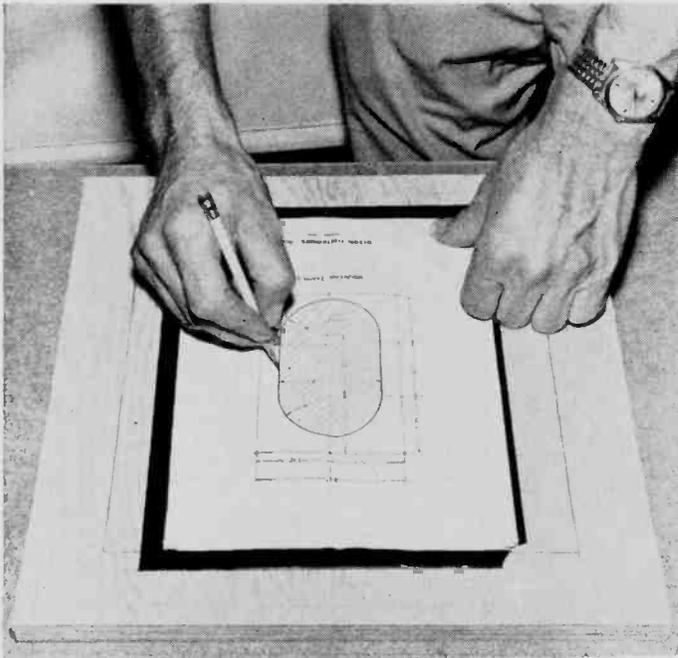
Provided with crossover network is template that determines dimensions of cut-out on bottom of enclosure. Use carbon paper to transfer dimensions to bottom plate.
